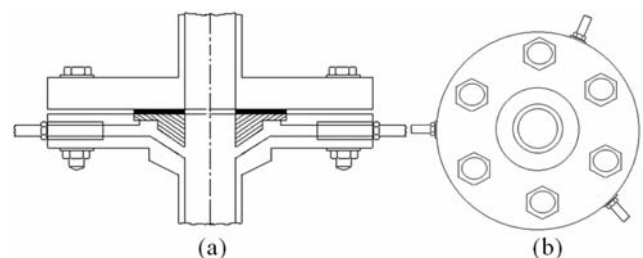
(a) Front view and (b) Top view of specially designed throated flange
